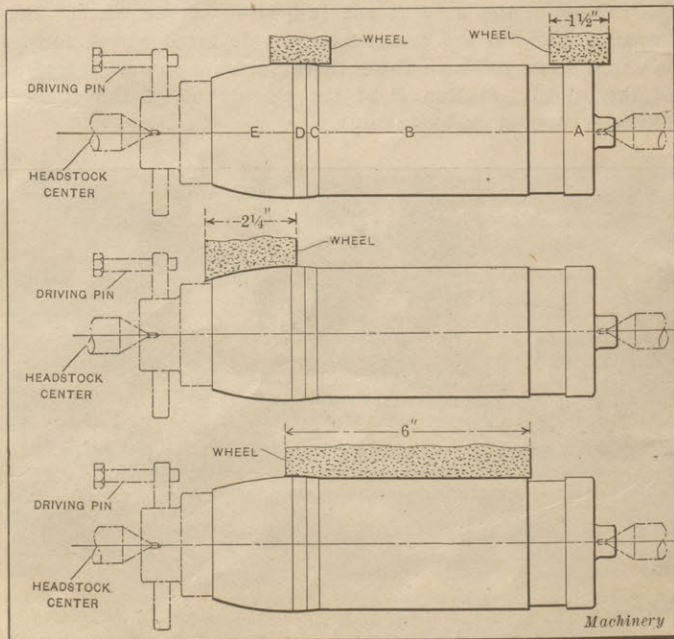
Three-operation Method of grinding Shrapnel Shells on Norton Grinding Machines
